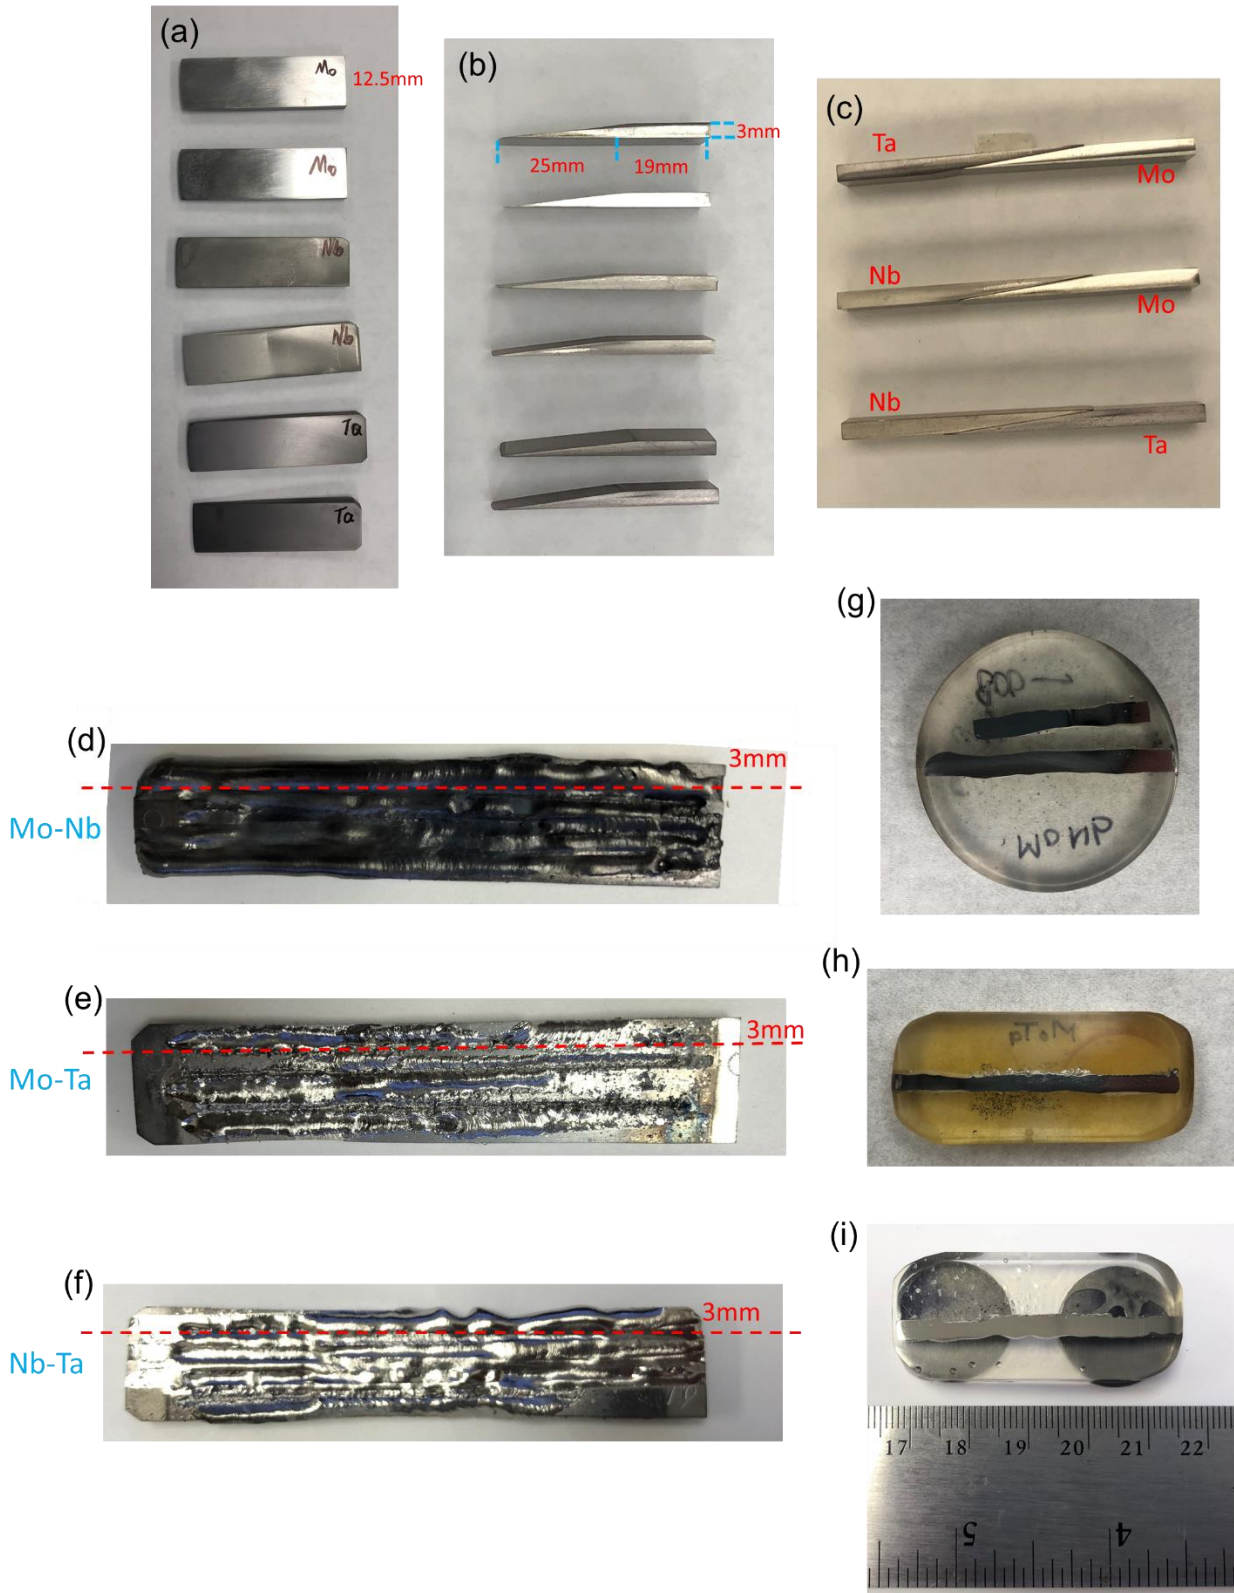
The experimental procedures of preparing the electron-beam (EB) welded macro-gradient samples. (a) and (b) are the top and side views of each metal piece. (c) is the arrangement of the metal pieces before EB welding. (d), (e), and (f) are the EB-welded macro-gradient samples for the Mo-Nb, Mo-Ta, and Nb-Ta binary systems, respectively. The red lines are the cutting lines for EDM machining. (g), (h), and (i) are the mounted samples for pieces cut from the macro-gradient samples for the Mo-Nb, Mo-Ta, and Nb-Ta binary systems, respectively.
